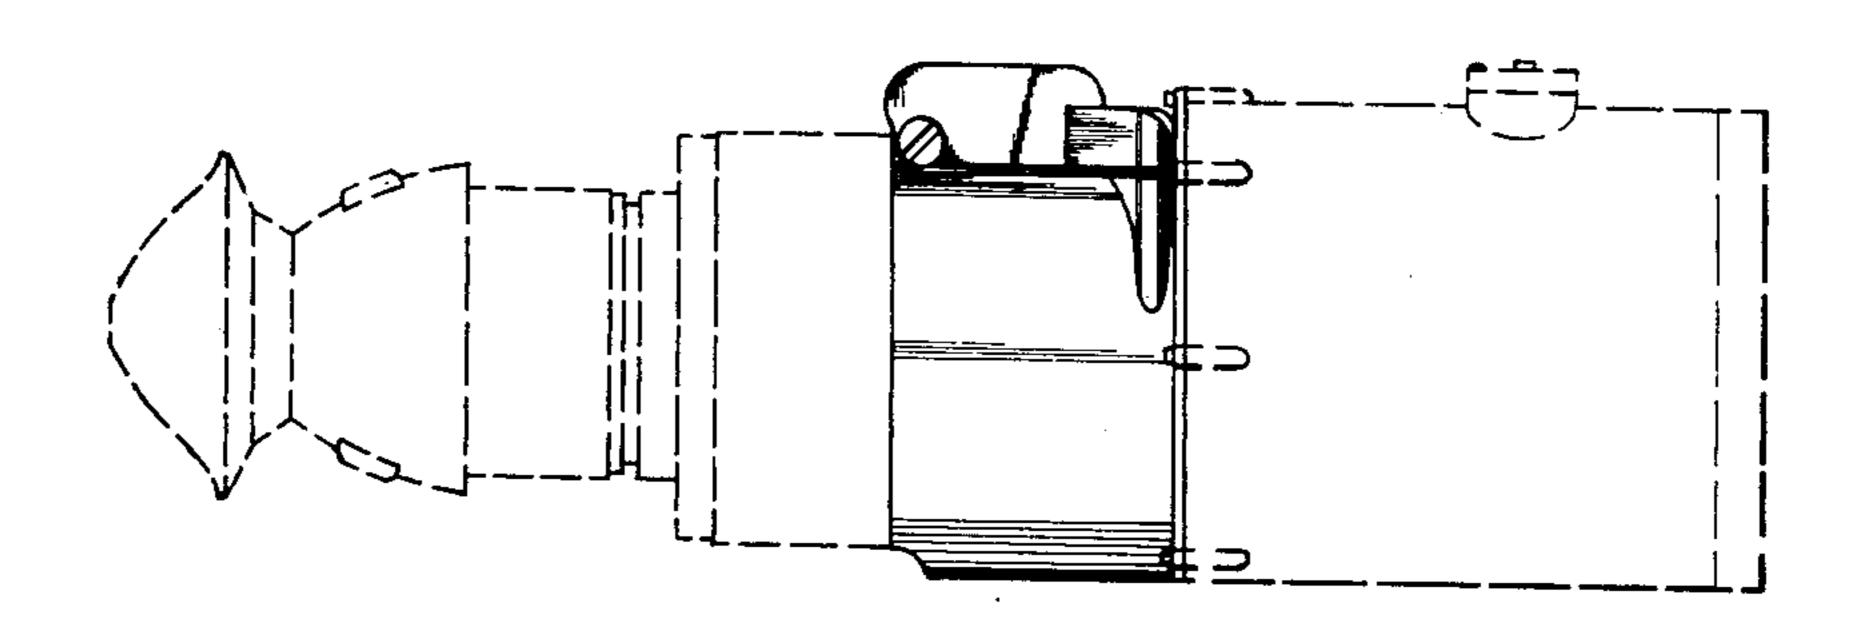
is a right side elevational view thereof, with the door of the battery housing open;
